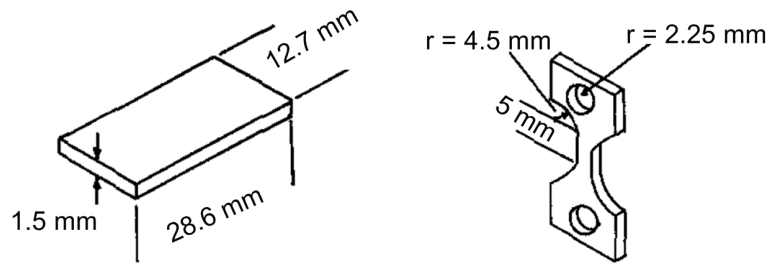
Bone specimens used in tensile tests by Crowninshield and Pope [14]
